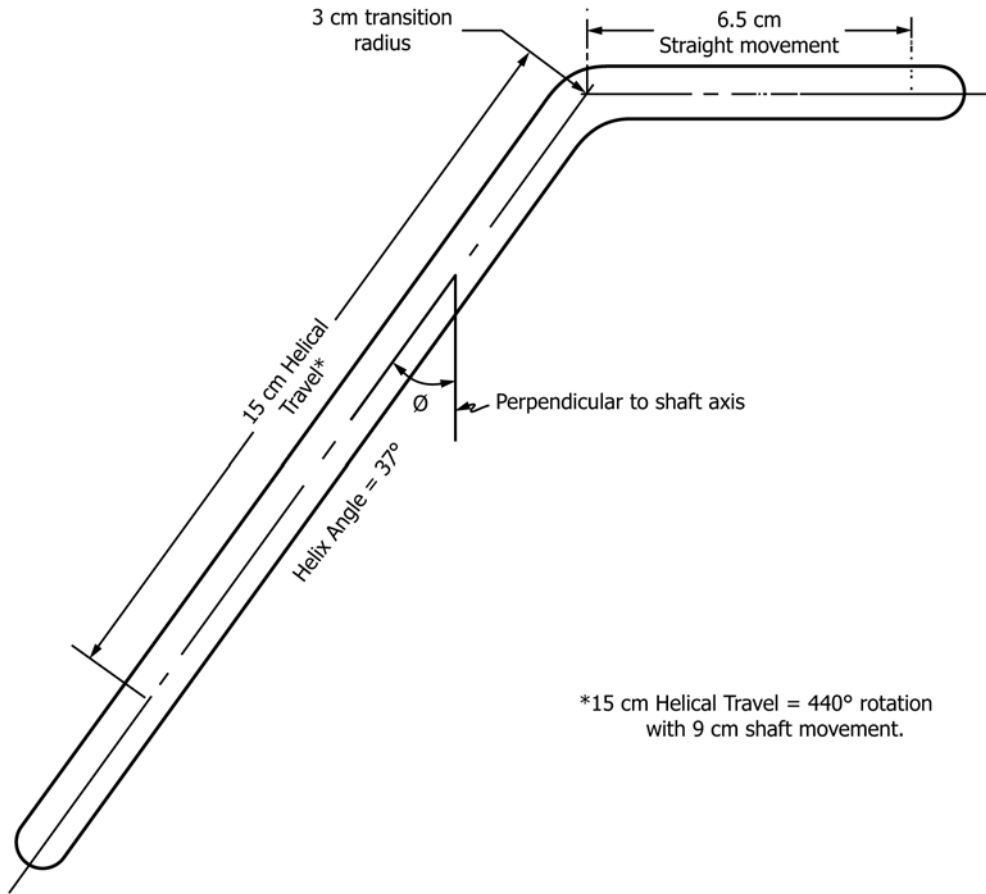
Planar Evolution of Gelbo Shaft Helical Groove 30.70-mm [1.20-in.] Diameter Shaft)
